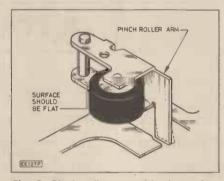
Pinch roller assembly, its surface should be flat. Clean with same solvent-used for the heads.
